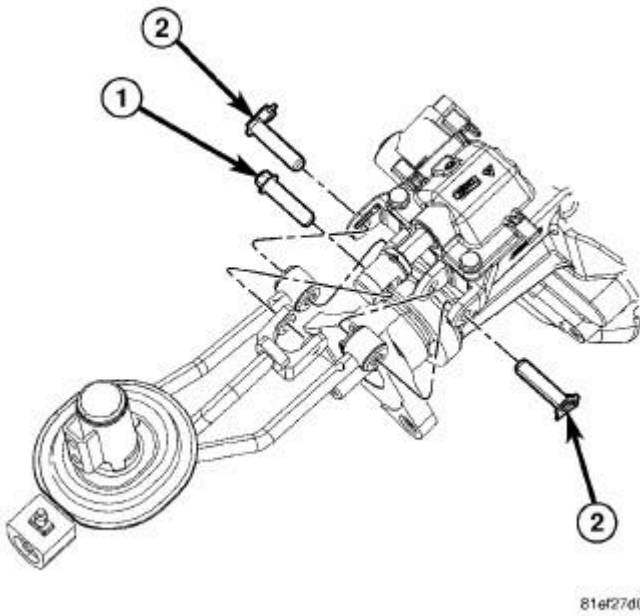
Identifying Shift Linkage Bolt & Roll Pins
